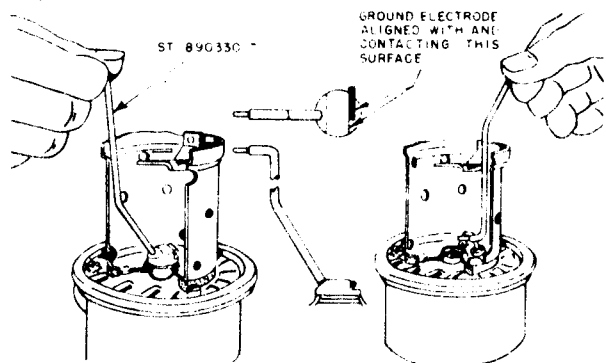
CHECK PLUG ALIGNMENT AND GAP
